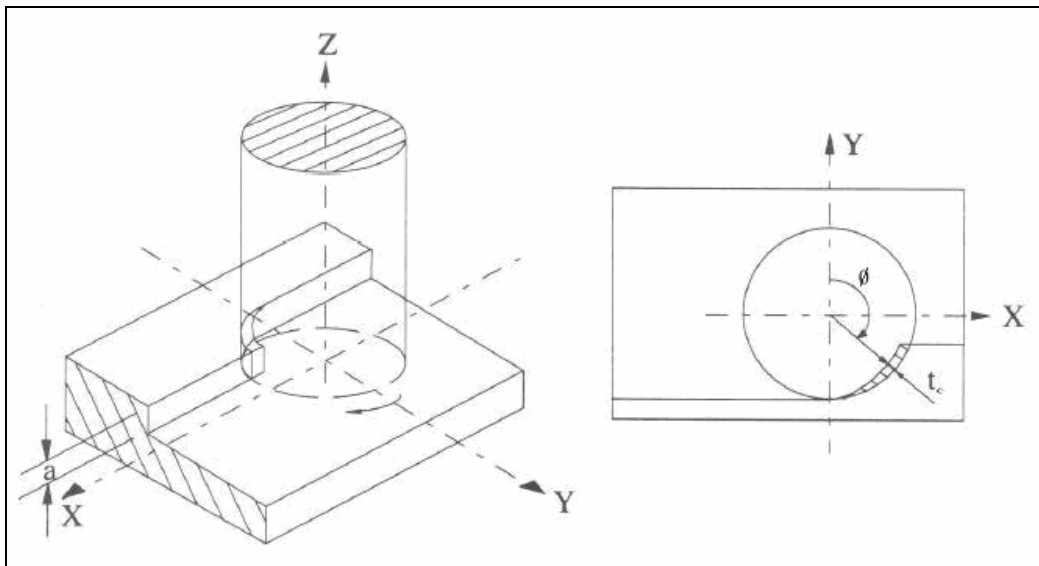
End milling geometry and chip formation from Guzel [34].
